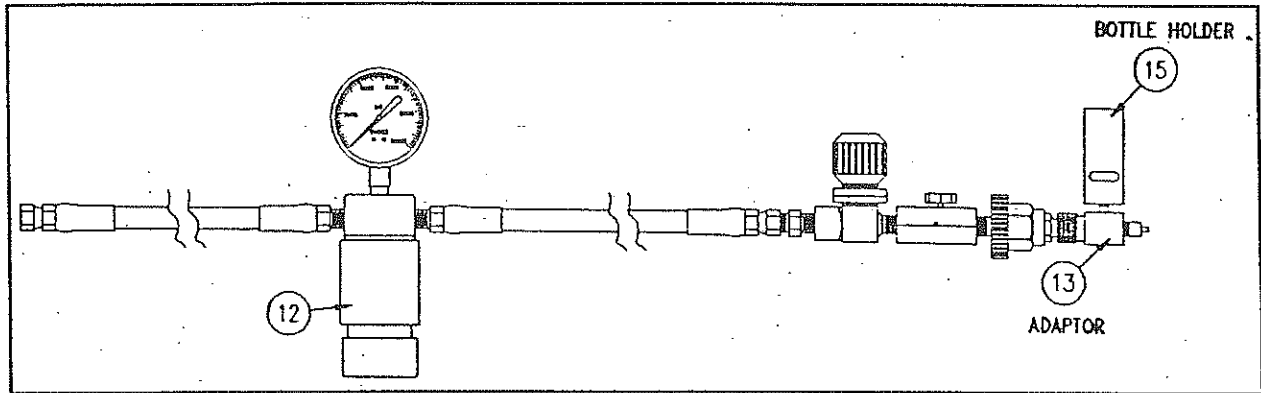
BOTTLE HOLDER INSTALLATION
